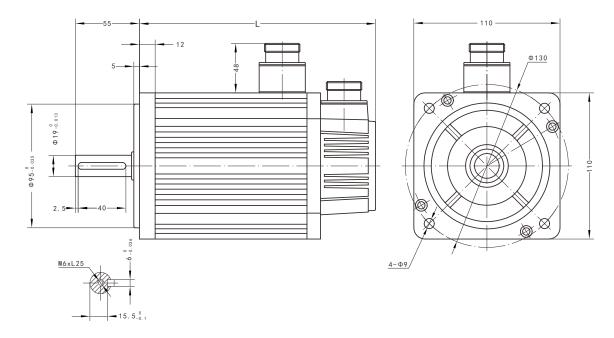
Installation dimensions of WE series 110 flange servo motor (5) Installation dimensions of WE series 130 flange servo motor
